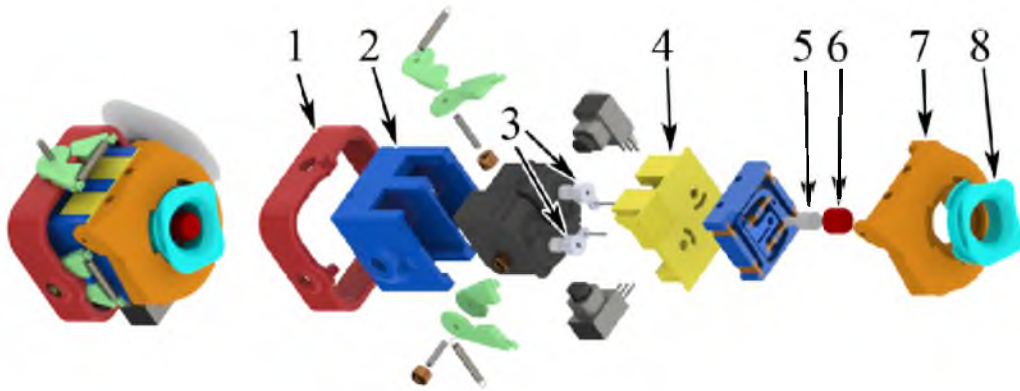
Diagonal view with gimbal assembled and exploded. (1) Gimbal ring (2) Inner gimbal block base (3) Servo Arms (4) Gimbal block insert (5) Machined brass threaded rod (6) ThinkPad TrackPoint cap (7) Gimbal block top dome (8) Adjustable thumb aperture
